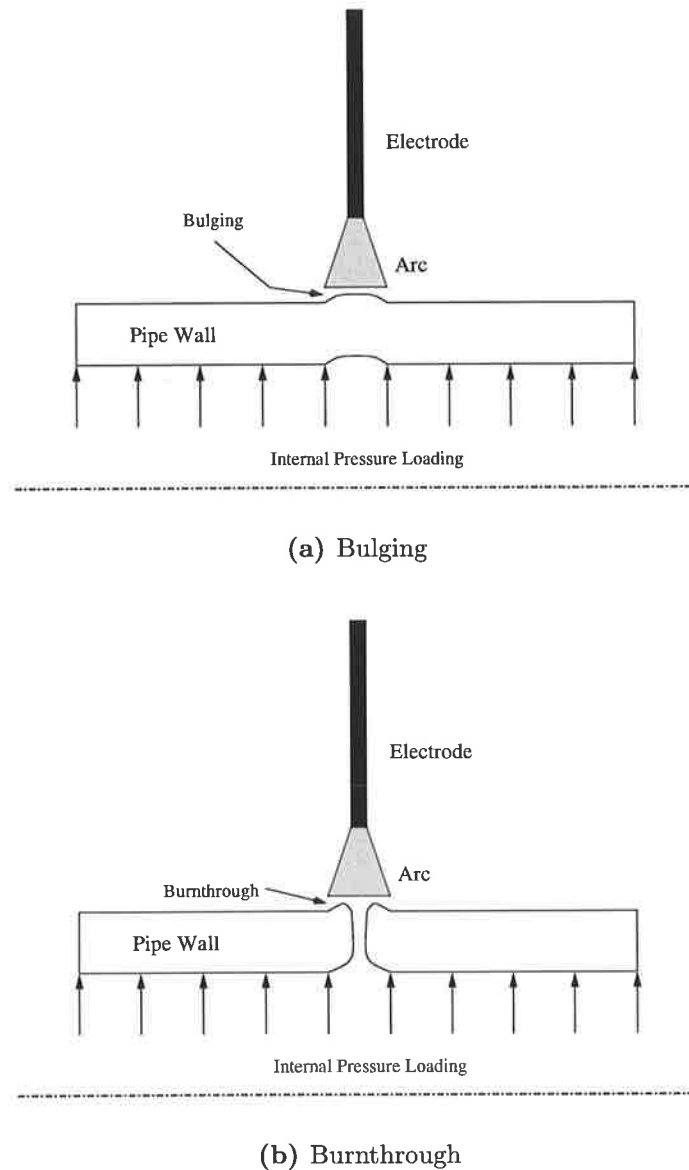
Types of pipe wall failure due to in-service welding.
